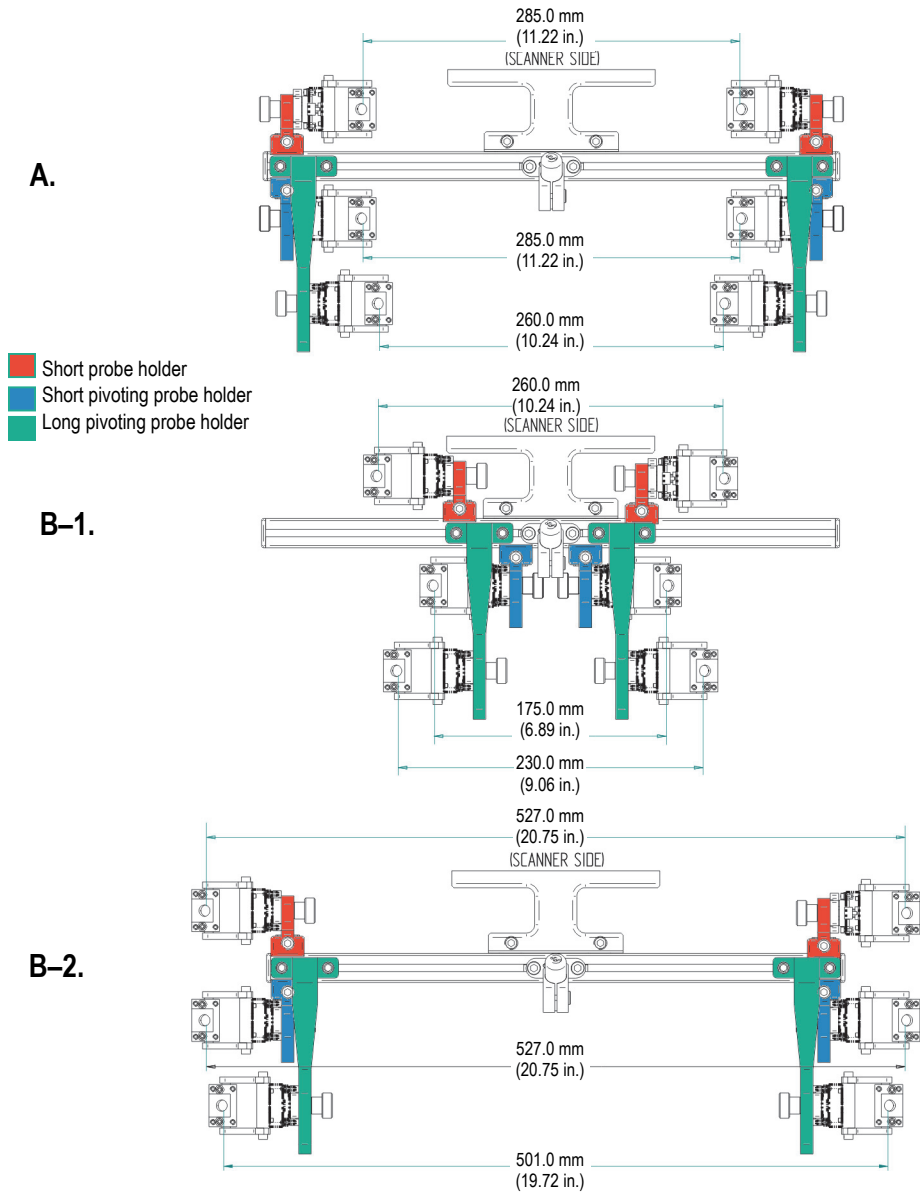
WeldROVER—PCS for TOFD wedge type
